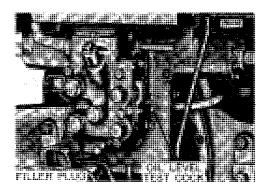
Powr-Trol Oil Level Test Cock and Filler Plug
